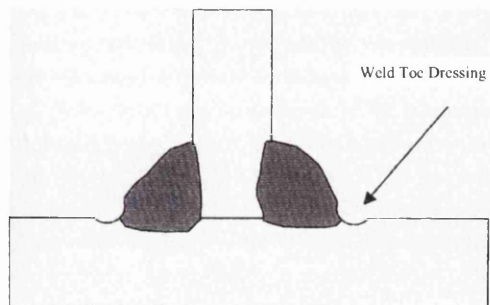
Weld Toe Dressing to Remove Geometric Stress Concentrations and Intrusions
